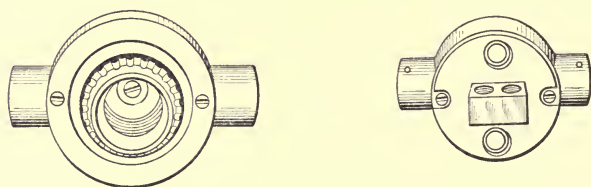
CONDUIT BOX SOCKET AND OUTLET.
